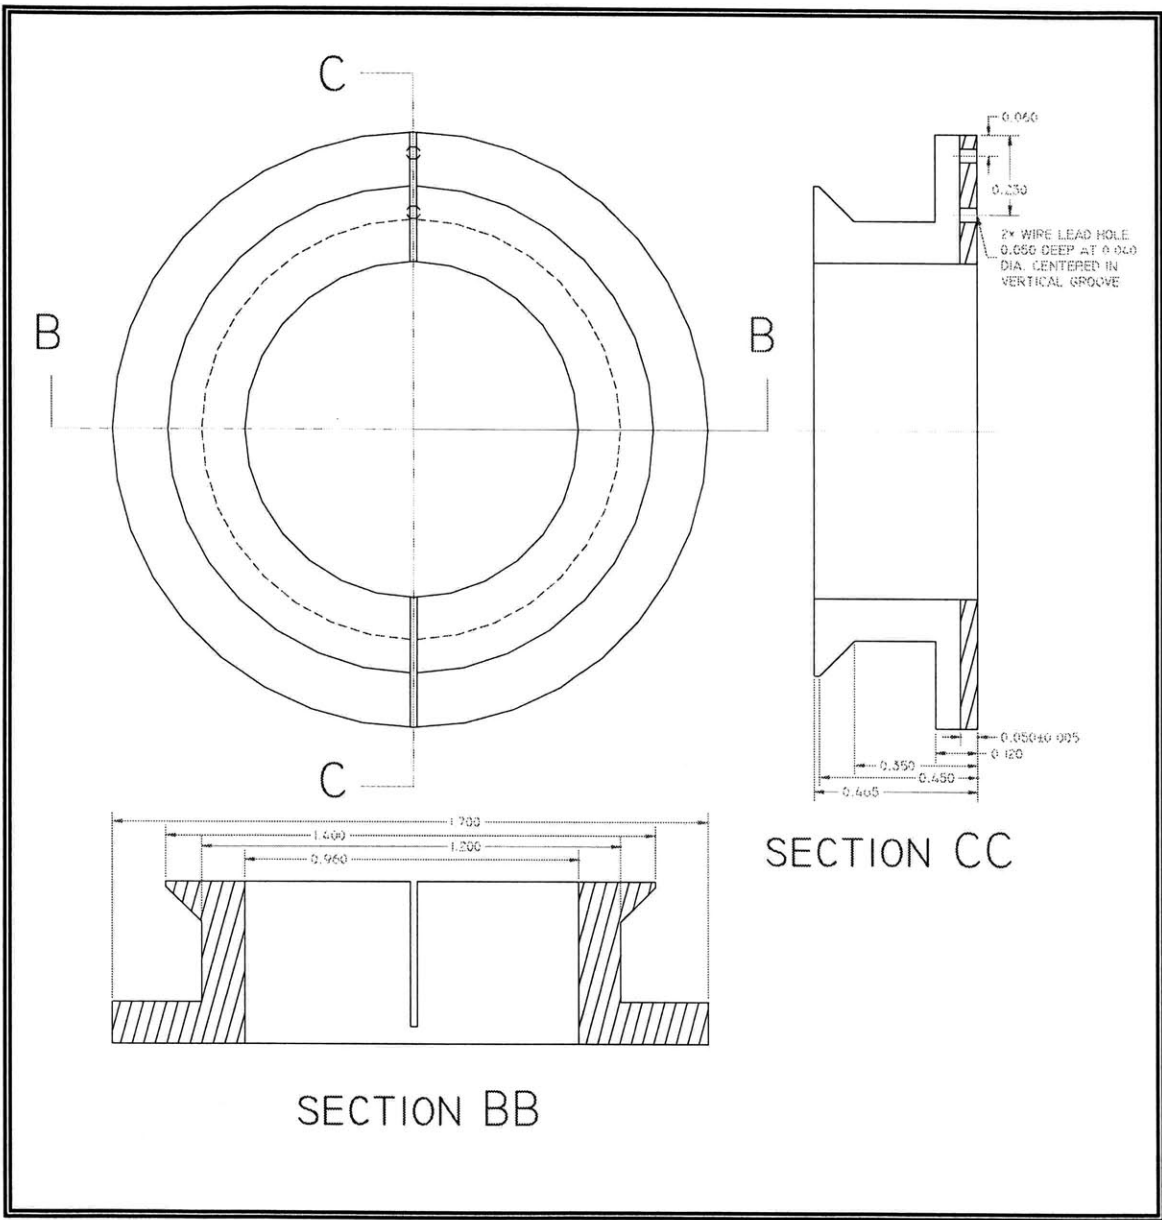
The outlet valve spool has the same valve coil area as the inlet valve, although the outlet valve coil contains a greater length of wire because its diameter is greater
